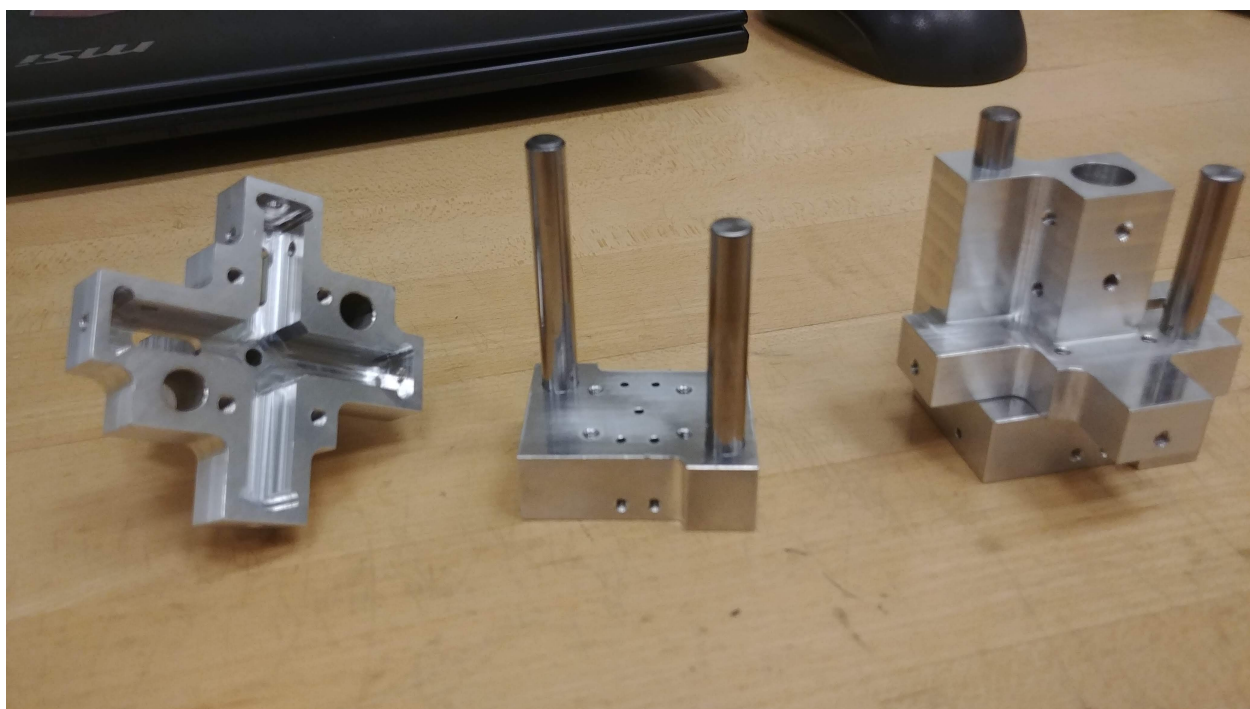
Left) The piezo holder. Middle) Base plate which attached to trap apparatus base. Two guide rods were used to align the piezo holder. Right) Assembled apparatus.
